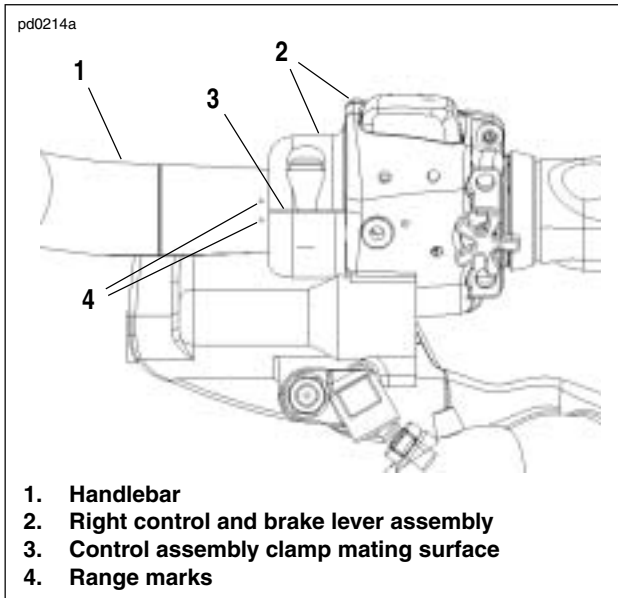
Right Handlebar Control Assembly (Bottom View)
